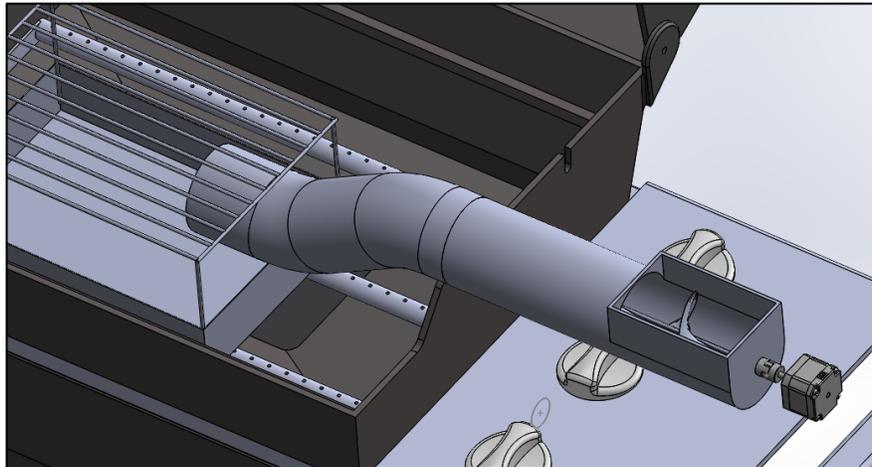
Basic auger design showing feed, tray, and motor
